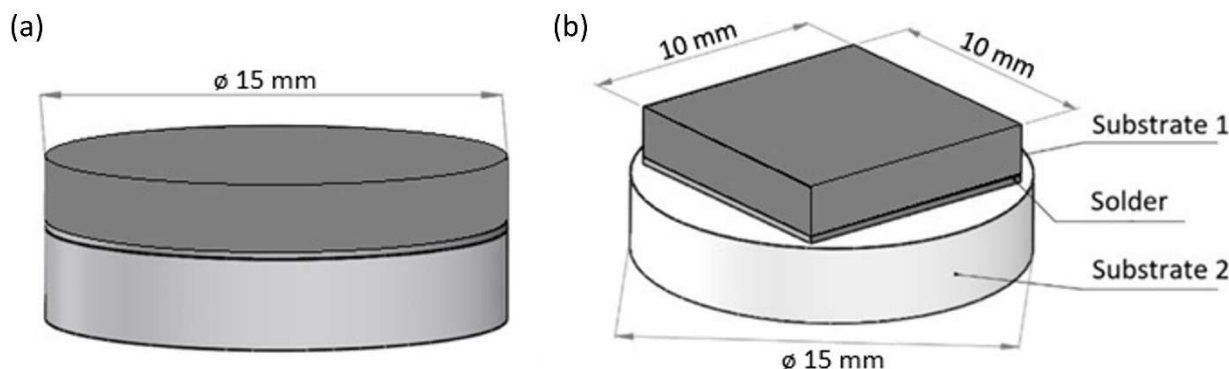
Soldered joint assembly (a) for analysis of solder/substrate boundary, and (b) for shear strength measurement.
